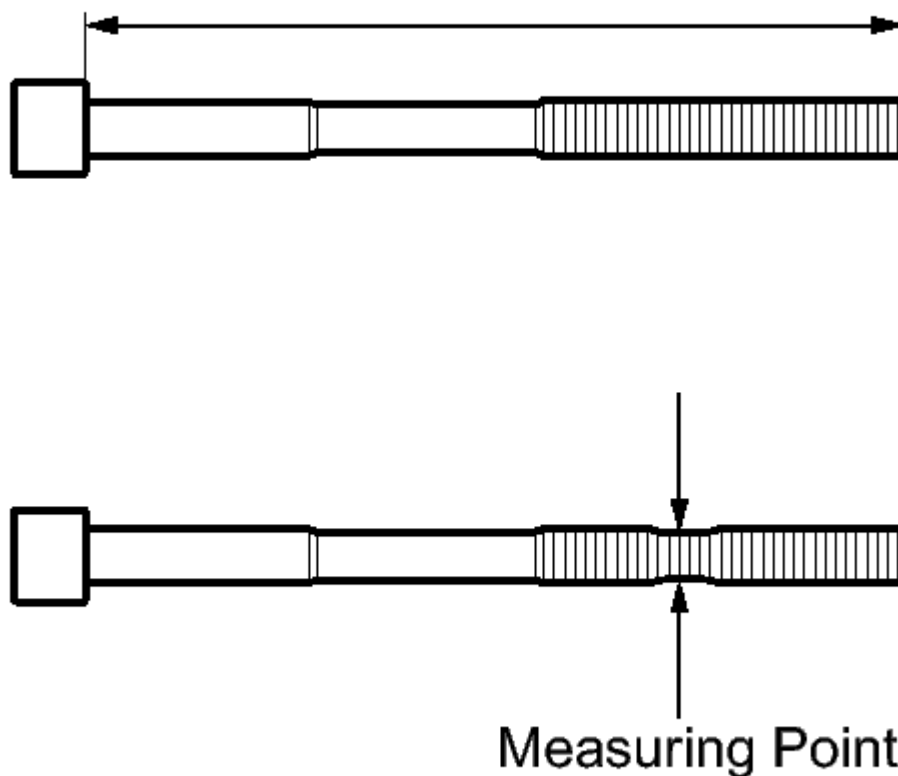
Identifying Cylinder Head Set Bolt Measuring Points
